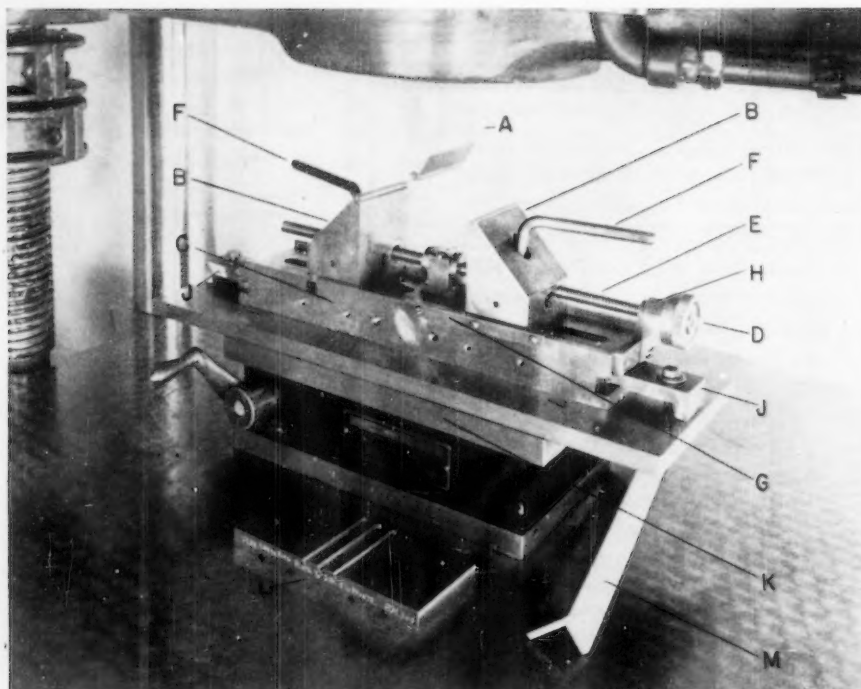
The Flexure Test Jig, with $\frac{1}{8}$ -in. Radius Supports, in Place in a Hydraulic Testing Machine.
